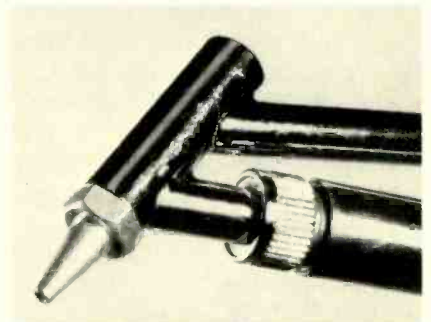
This 0.063-in. inside-diameter tip is considered standard for a desoldering iron.
